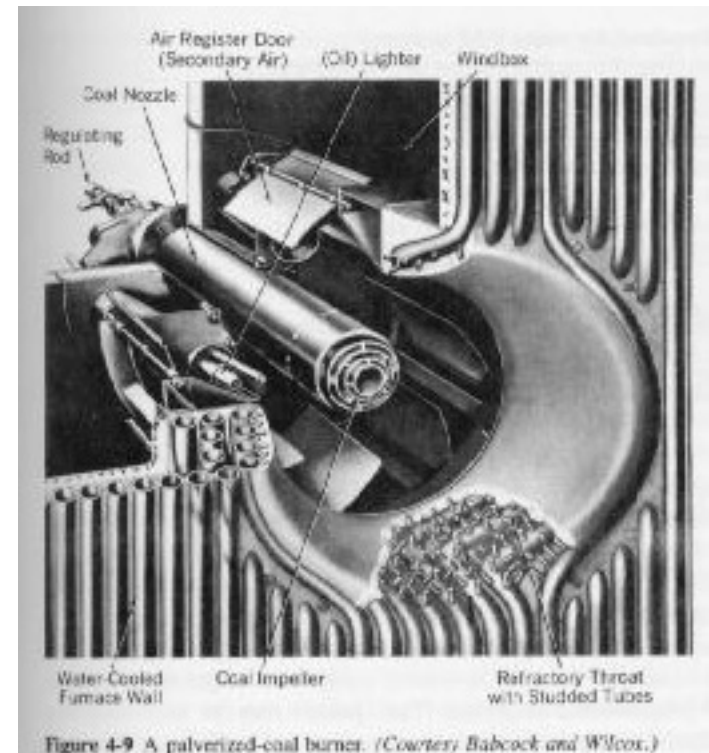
A pulverized-coal burner. (Courtesy Babcock and Wilcox.)
